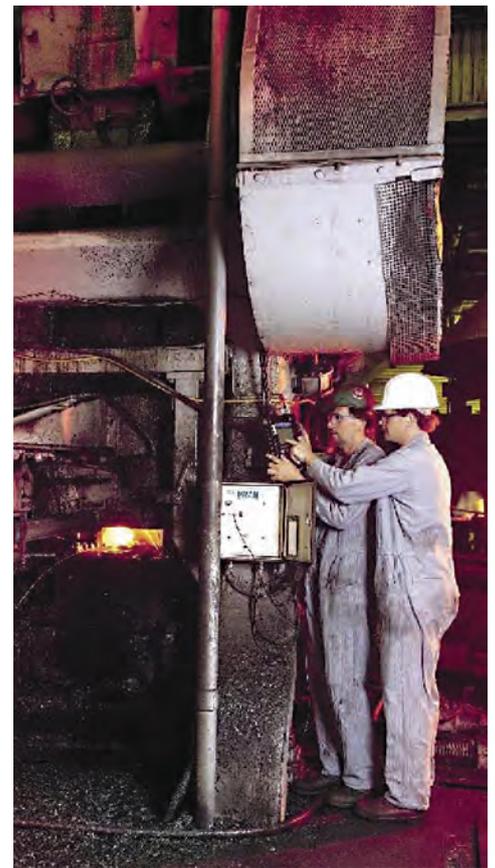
Forging hammer vibrations (Photo courtesy of IMI Sensors, division of PCB Piezotronics, Depew, NY)
